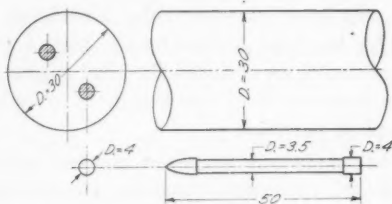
ARRANGEMENT OF THE SPECIMEN AND MEASUREMENT OF THE DILATOMETER ROD IN MILLIMETERS
